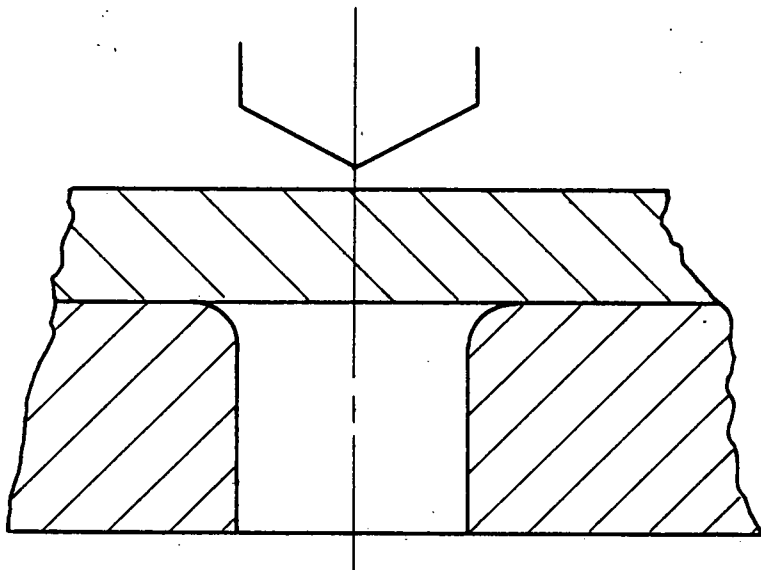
Lead-In Radius on Bushing Provides Space for Burr Formation
